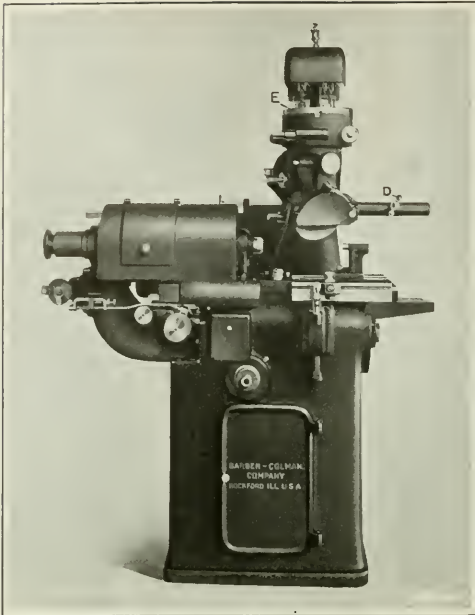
Automatic Hob-sharpening Machine brought out by the Barber-Colman Co.
